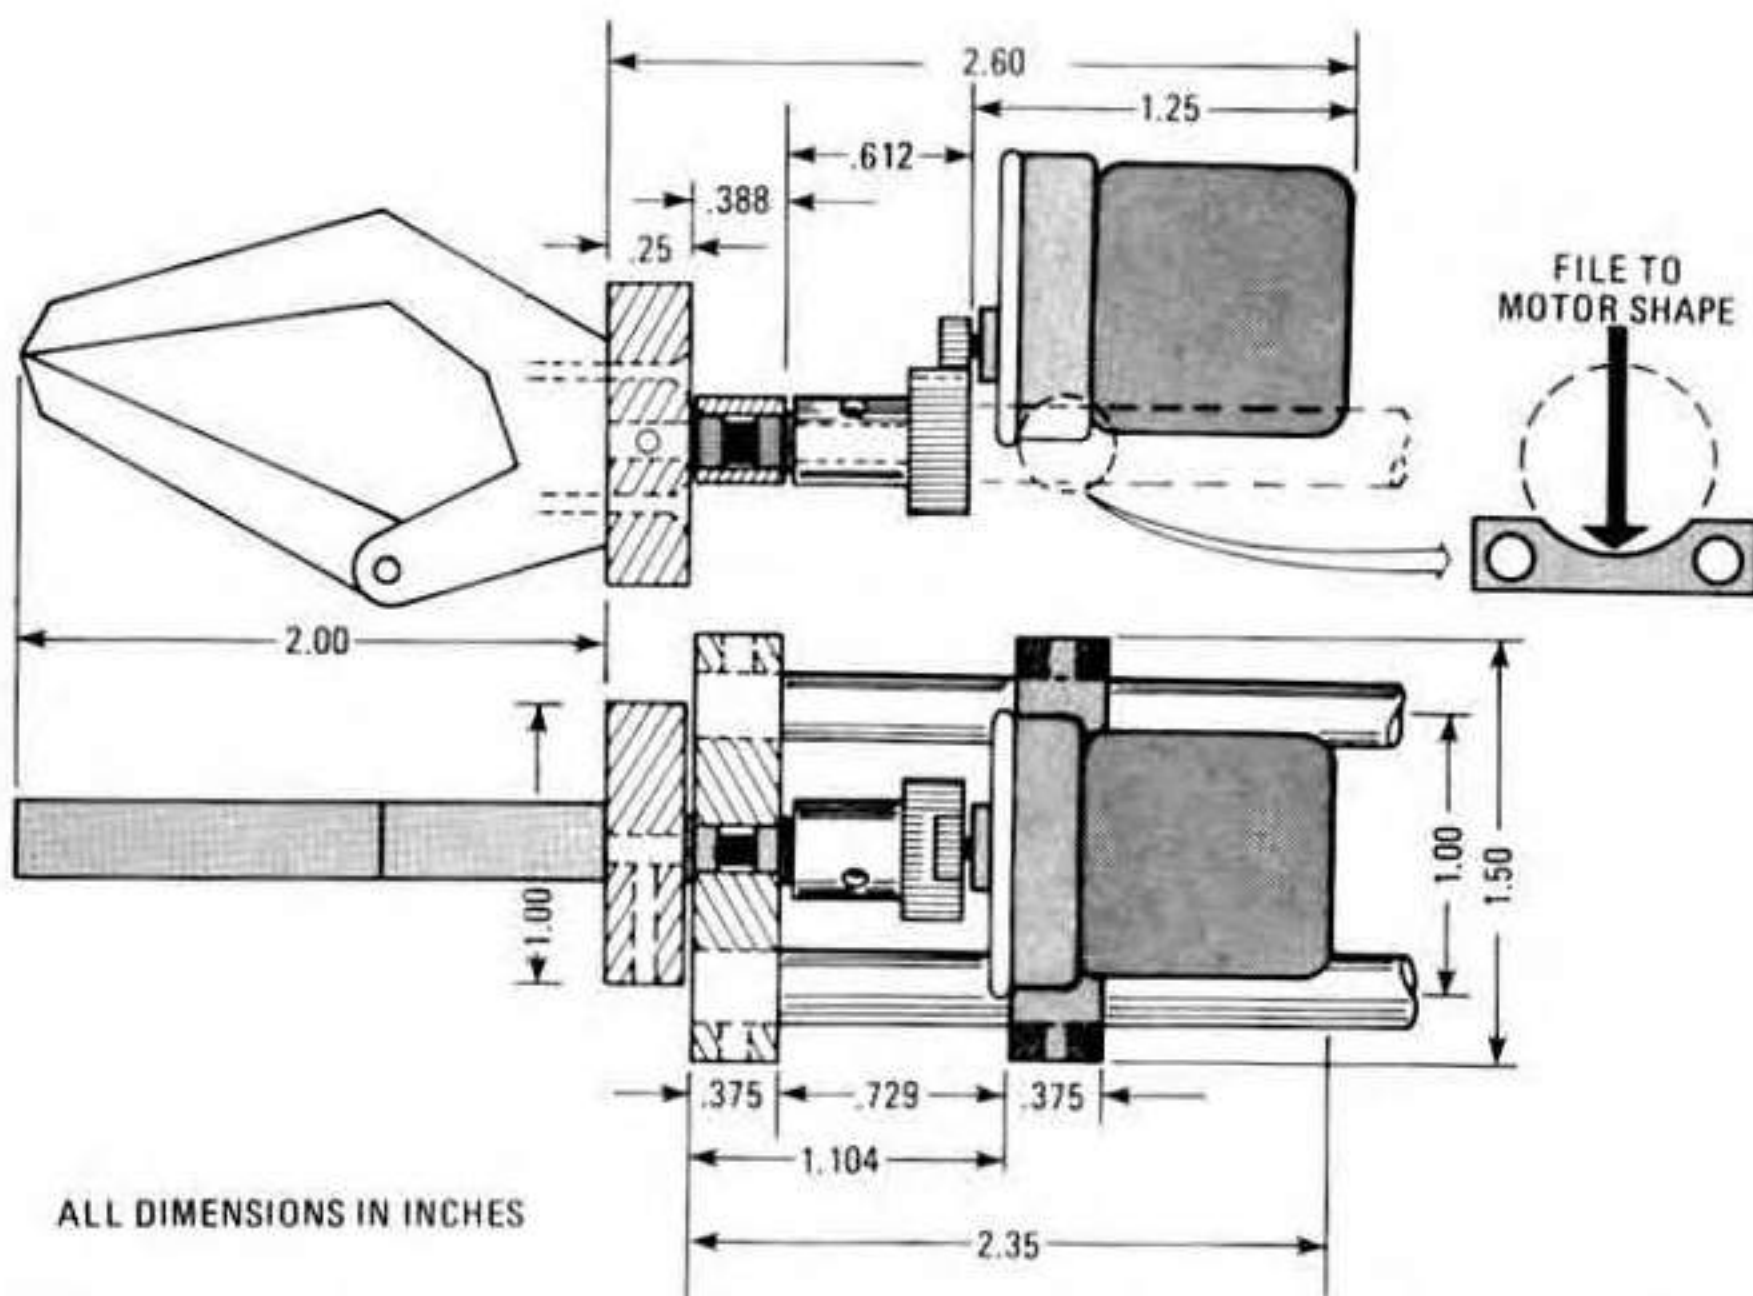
SMALL GEAR ON STEPPER-MOTOR SHAFT does not have to be purchased separately—it comes with the motor. Note use of bearings through first cross-bar rod.
